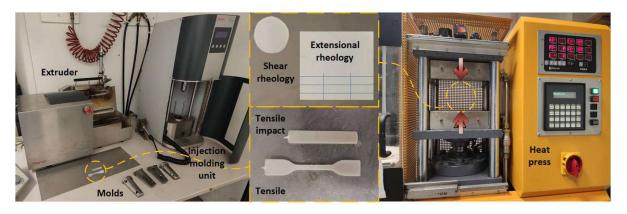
Manufacturing of mechanical (tensile, tensile impact) and rheological (shear, extensional) test specimens trough injection- and compression molding
